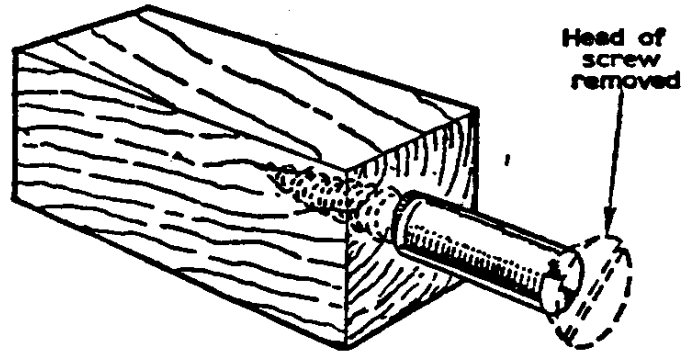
A suitable bobbin holder for use with a geared brace for winding.
